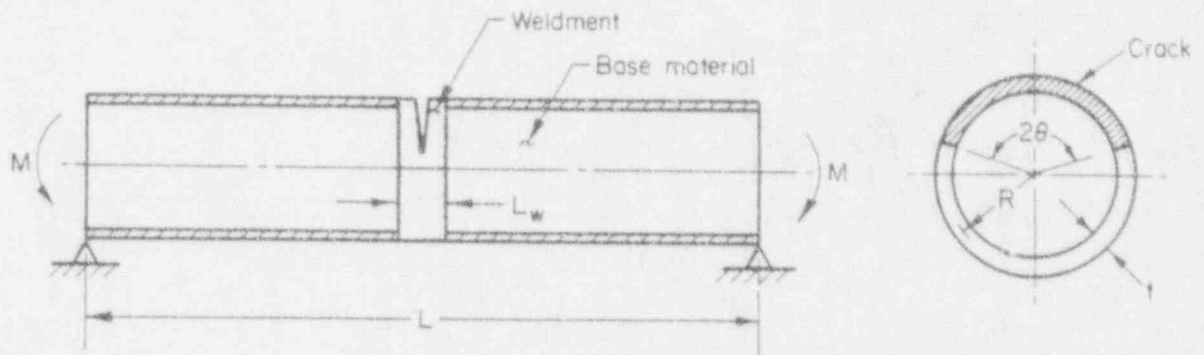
Schematics of pipe weldments with a circumferential flaw
